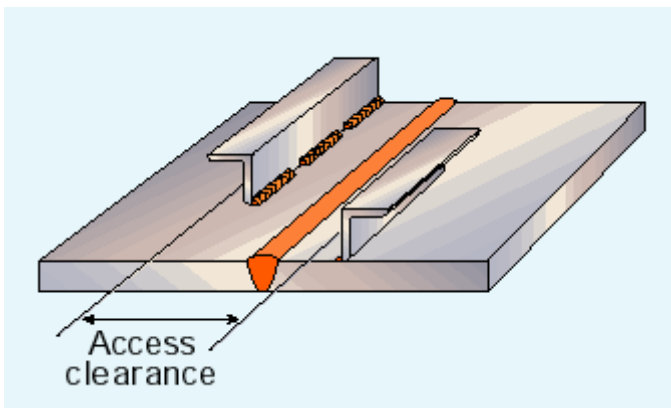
Longitudinal stiffeners prevent bowing in butt welded thin plate joints
